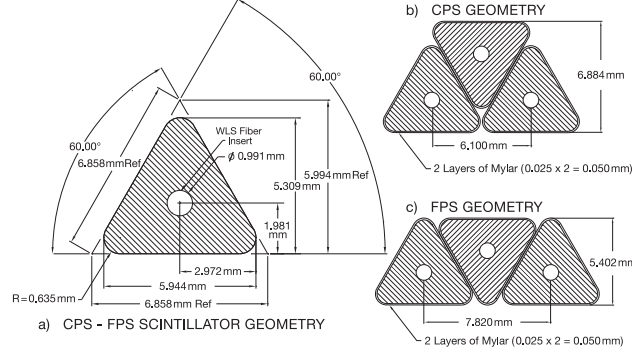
Cross section and geometrical layout of the CPS and FPS scintillator strips [43].
